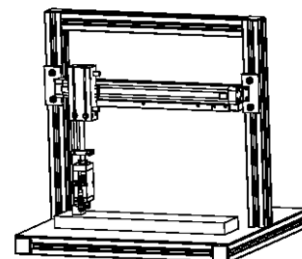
Rodless cylinder with integrated guiding and vertically transferable gripper
